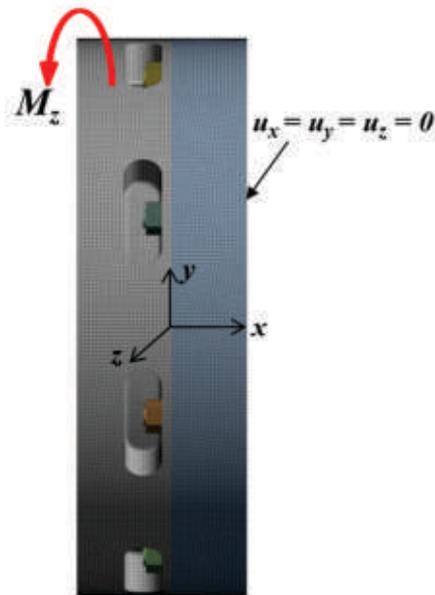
Details of a stud-nut-slot type FIJ connecting airframe sections-1 and 2
